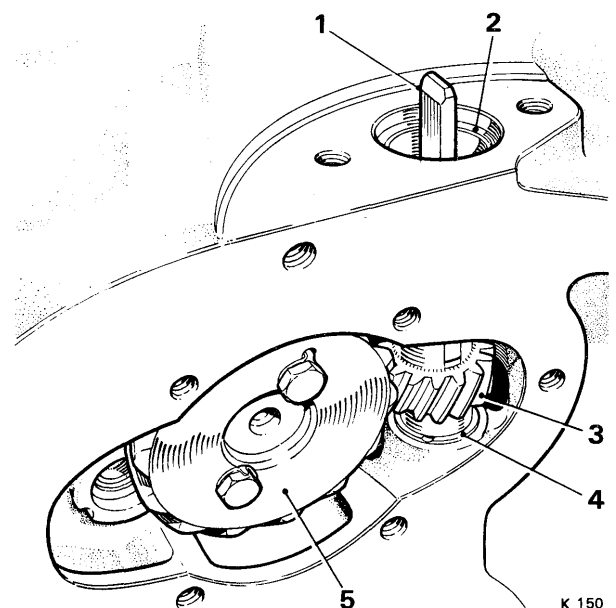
VIEW OF DISTRIBUTOR DRIVING GEARS
